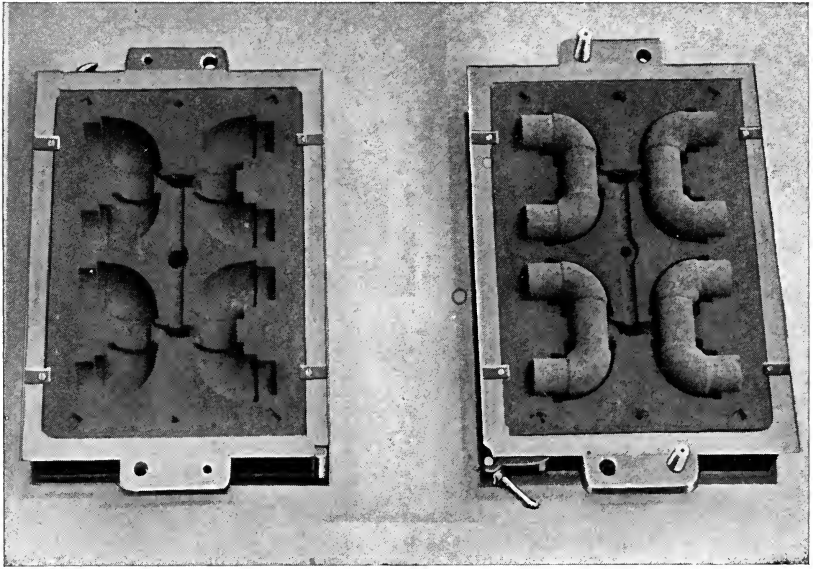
Cope and drag halves of mold for  $\frac{3}{4}$  inch, street elbow castings
